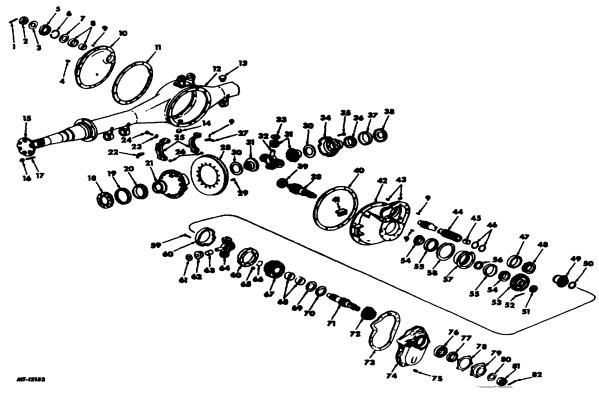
Single Reduction Forward Rear Axle (Exploded View)
